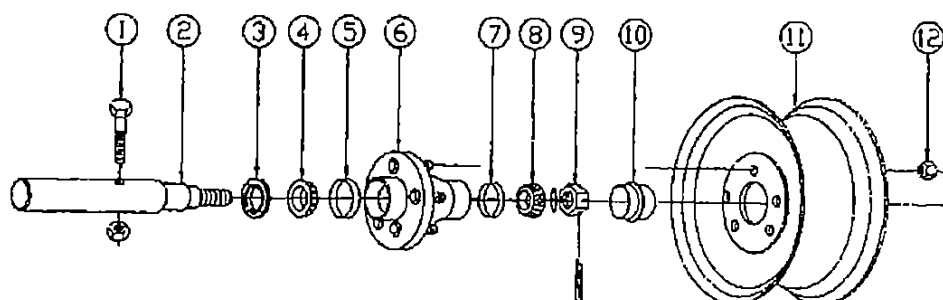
PNEUMATIC WHEEL COMPONENTS
